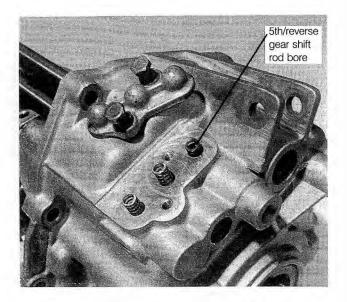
Shift rod detent balls and springs installed into transmission case. Detent balls are under springs.
